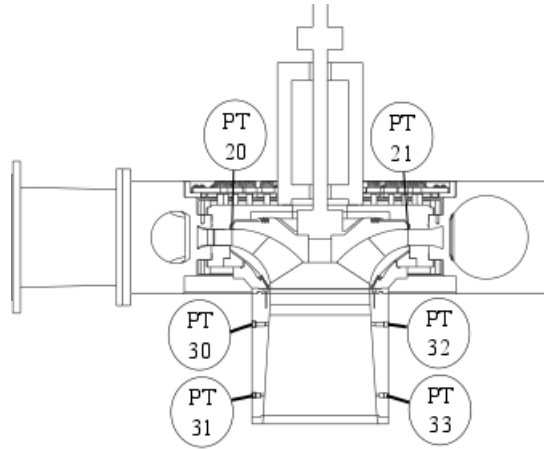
Pressure sensors in the vaneless space and in the draft tube cone
